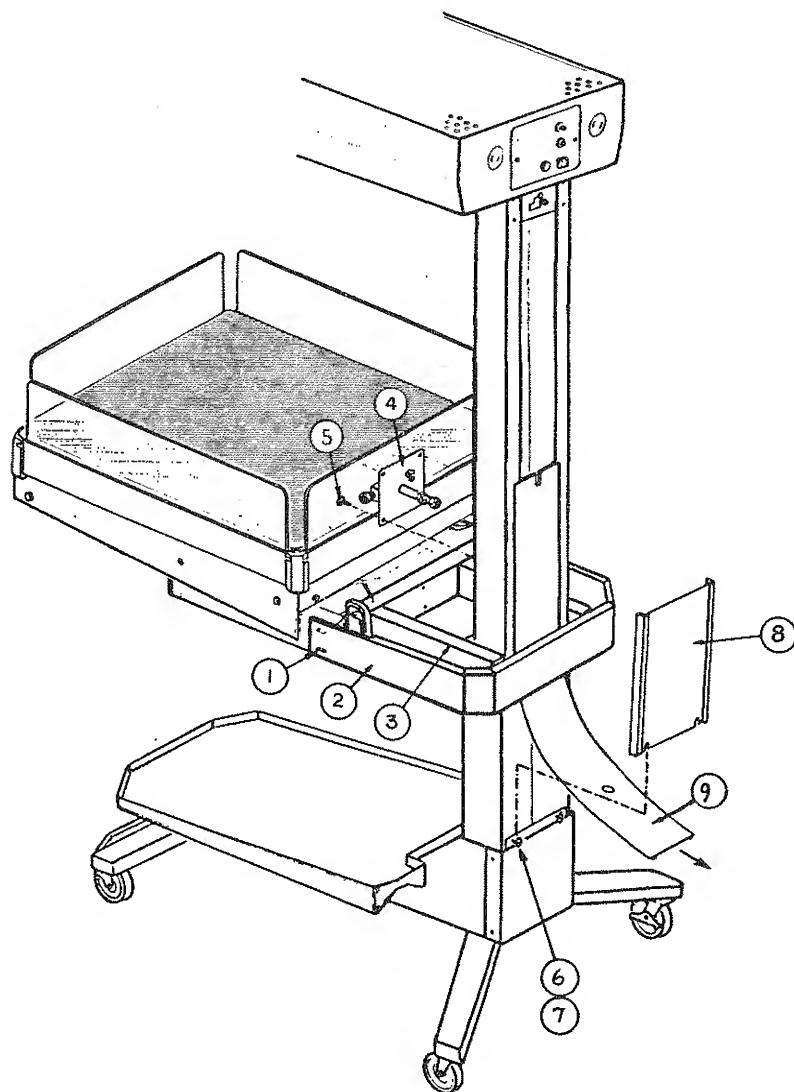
MOUNTING POST TRIM STRIP REMOVAL AND REPLACEMENT
